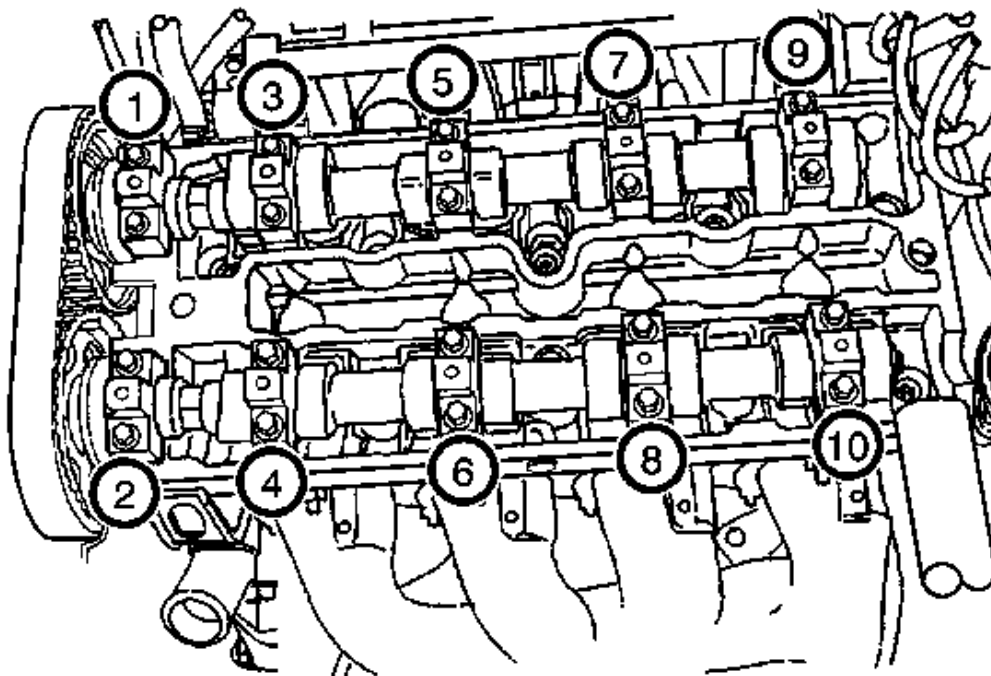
View Of Camshaft Bearing Caps And Bolts
